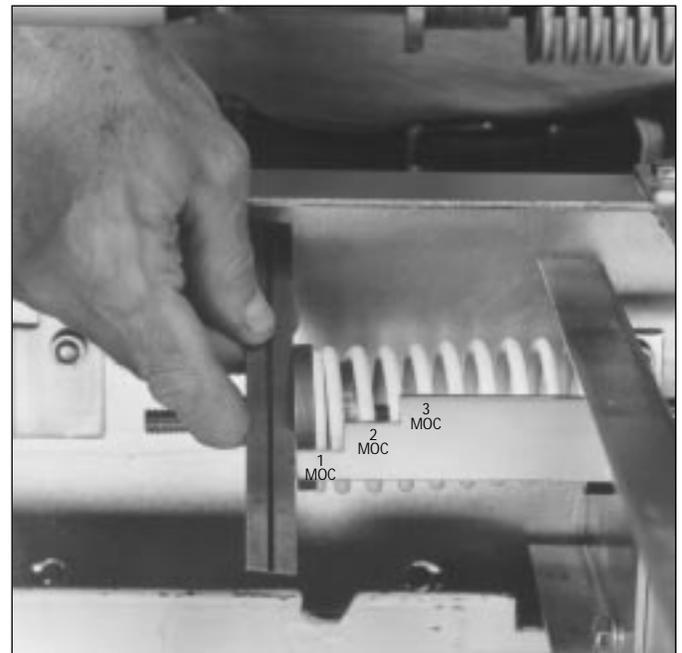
Checking Drive Spring for Proper Adjustment for One Installed MOC Switch
